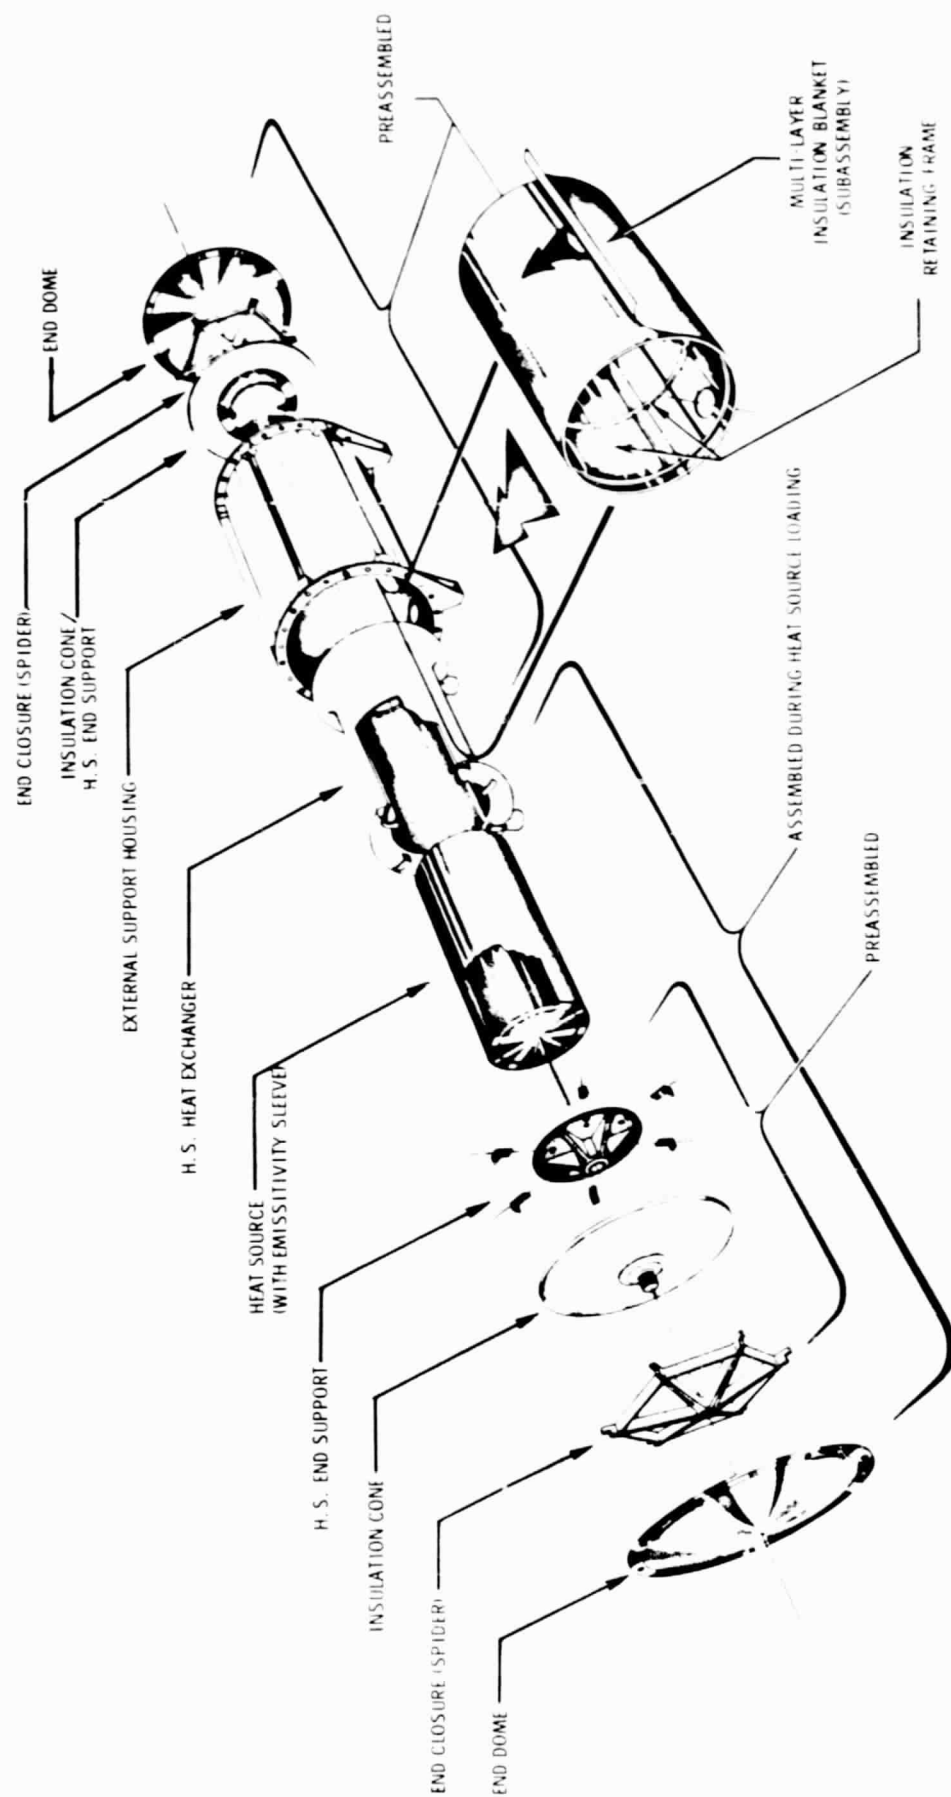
Reference Baseline Heat Source Assembly - Exploded View
